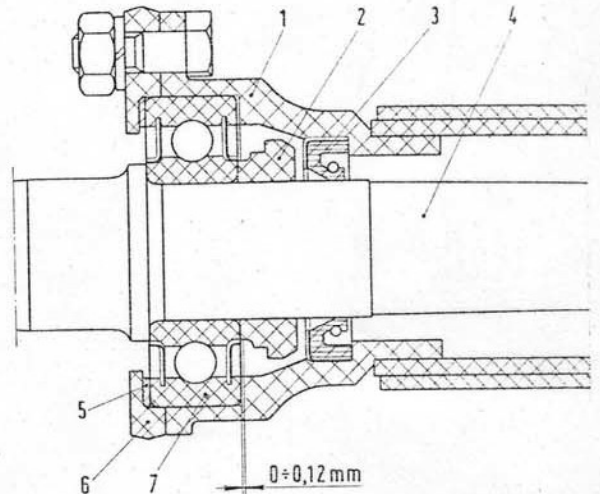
Scrap view of rear axle housing and axle shaft bearing side section.
